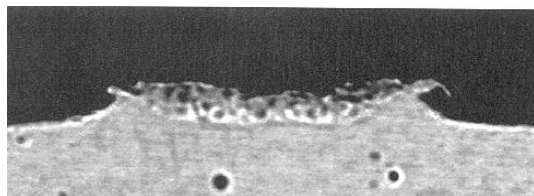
Thermal fretting fatigue cracks and broken-out material on solid tungsten carbide plunger
